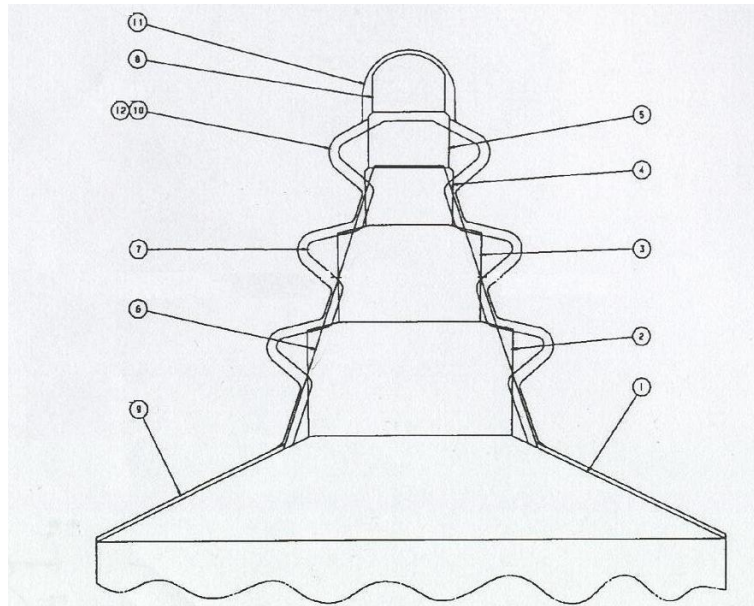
Tooth forms for different sections on a broaching tool set.
